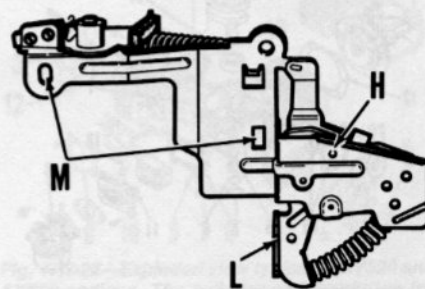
Push against lever (L) and insert a pin through holes (H) to hold brake pad away from flywheel.
